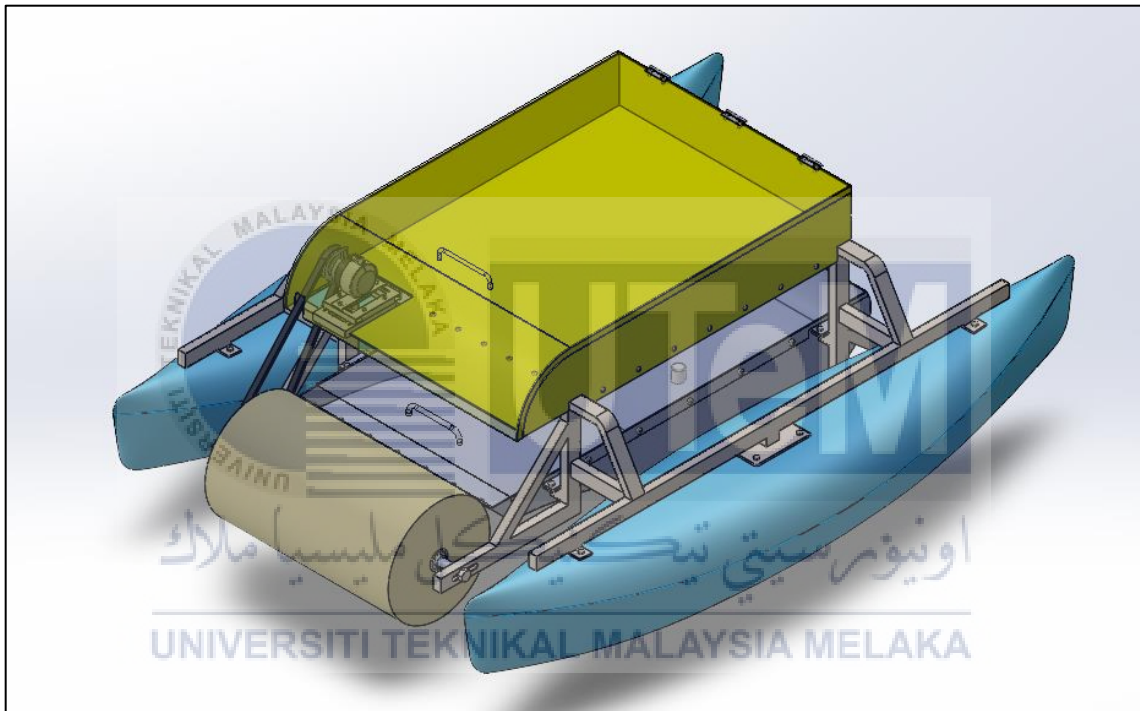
Isometric view of enhanced Portable Oil Spill Skimmer assembly
